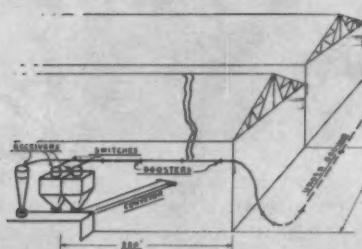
Core sand pneumatically conveyed from sand mills to core-room over this path.
